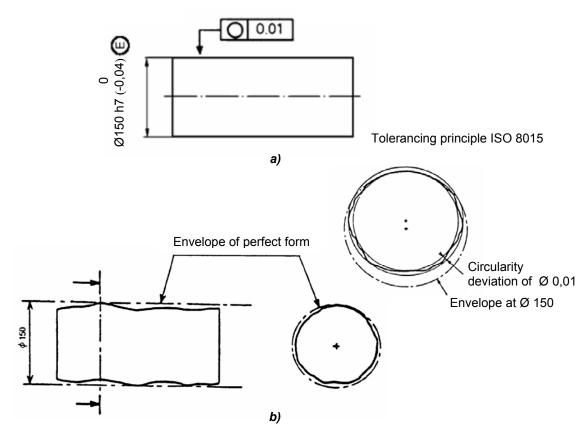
Envelope requirement: a) Drawing indication; b) Interpretation
